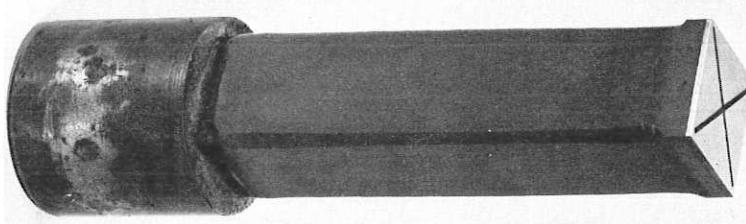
Simple generating tool. Electrolyte is supplied from the periphery of the tool and flows into the cross slots. The sides of the tool are insulated to prevent side-cutting.
